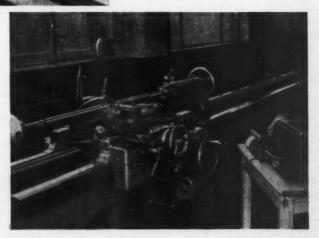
The set-up for machining face-plates on one of the company's 20-in. surfacing and boring lathes. A multiple tool A provides for boring the inner end of a stepped hole to 3 in. diameter, chamfering the end of the hole, boring a parallel register to 5·359 in. diameter, -0, +0.006 in., roughing a taper bore, chamfering the end of the taper bore and facing a narrow land. The taper bore is finished with the floating reamer at the left, and the land is again faced. Subsequently, the front of the workpiece is machined to blend with the land face
